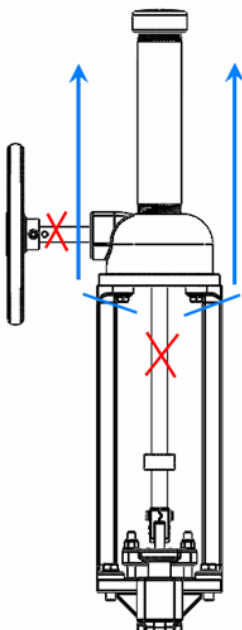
Knife Gate Valve with Bevel Gear Actuator, Vertical Lifting
